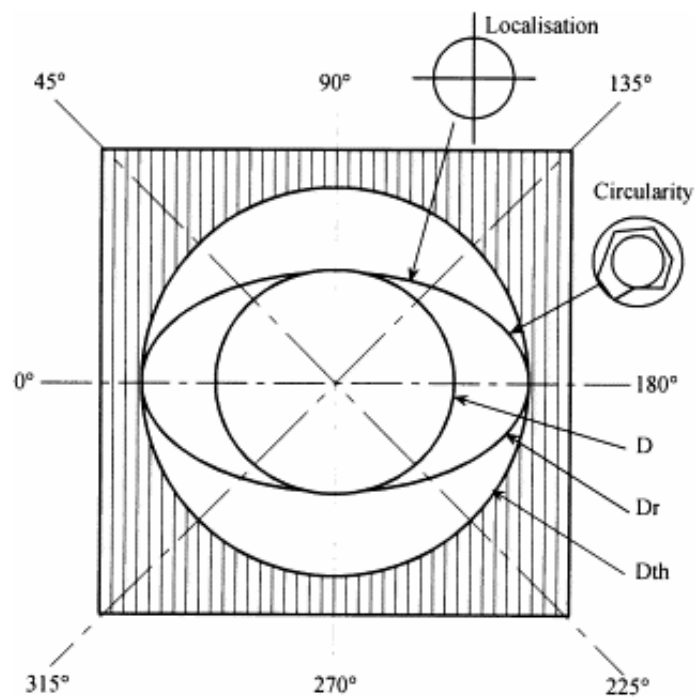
Hole defects observed in a unidirectional plate [48].
